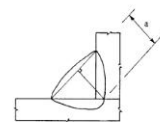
Throat thickness of a deep penetration fillet weld
